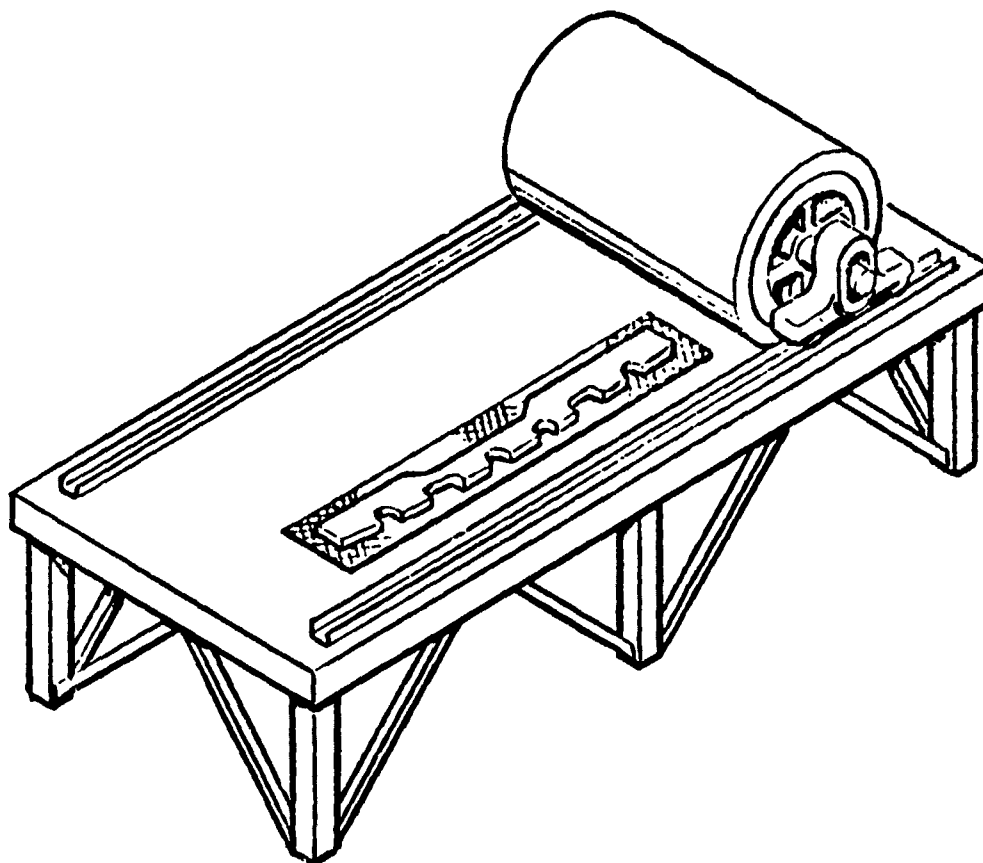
TRIMMING IRREGULAR CUTOUTS IN WING BOX ATTACH ANGLES
